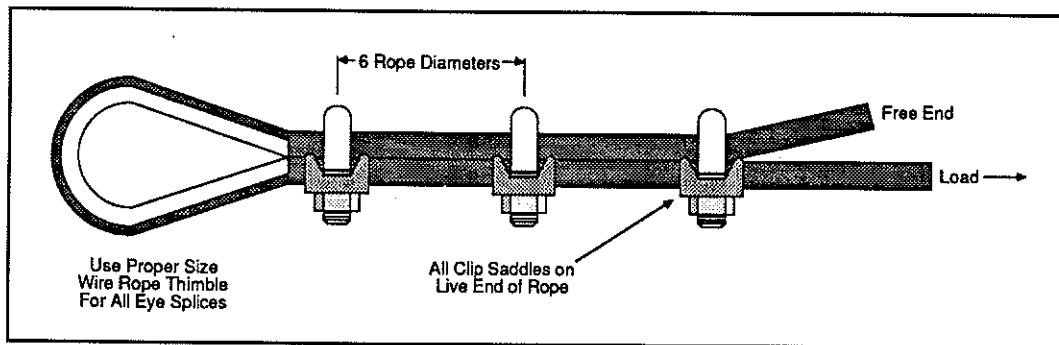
Installation guidelines for field-fabricated wire rope slings. Drawing courtesy of JBL, Inc.
